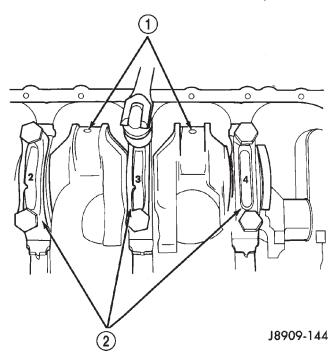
Removing Main Bearing Caps and Lower Inserts
